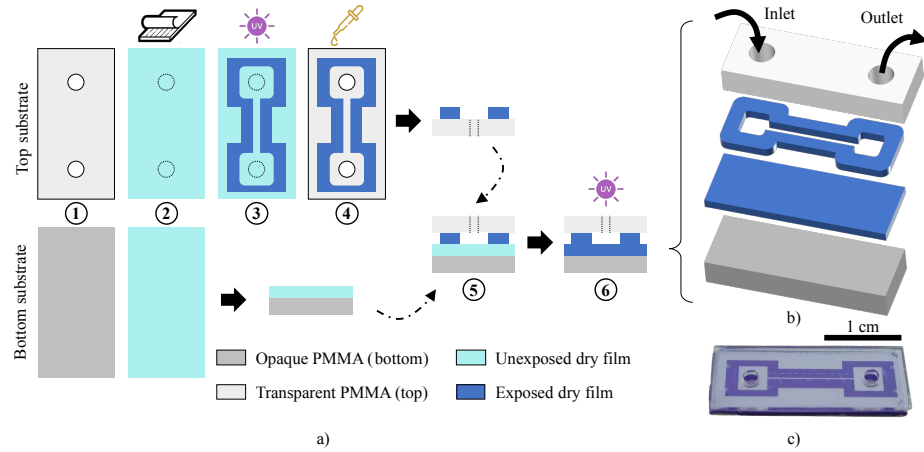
Schematic views of a) the fabrication process from raw materials to final chip assembly; b) the microfluidic chip with microchannel in an exploded view and c) picture of a completed chip.
